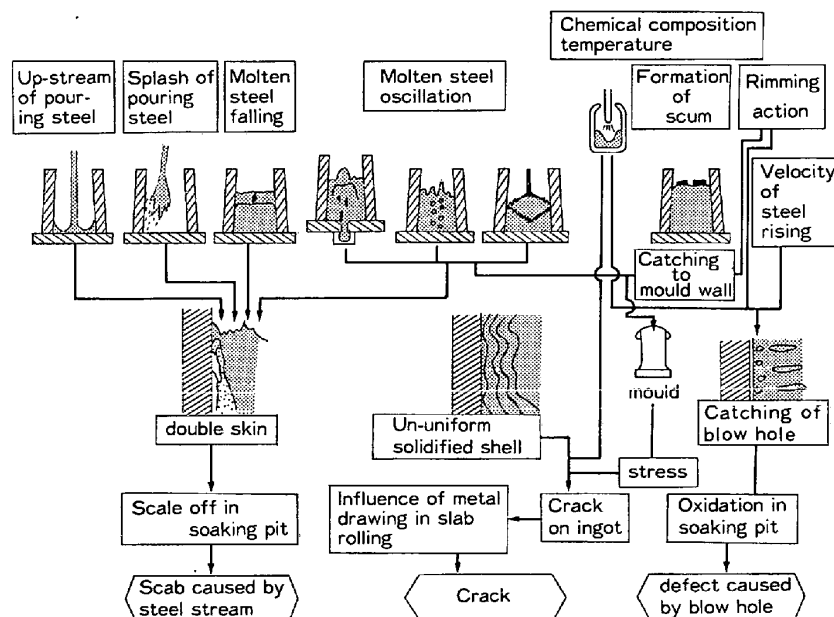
Mechanism of defect occurrence in casting process.
